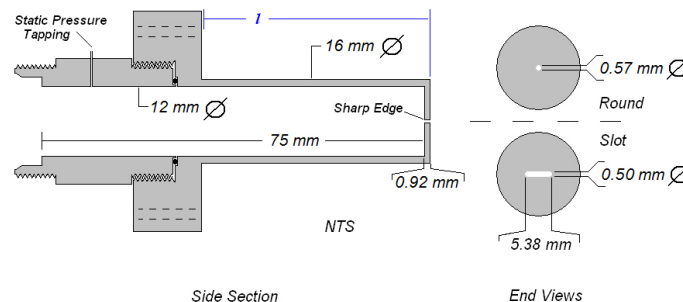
Injector nozzle nominal dimensions (all ± 0.01 mm)
